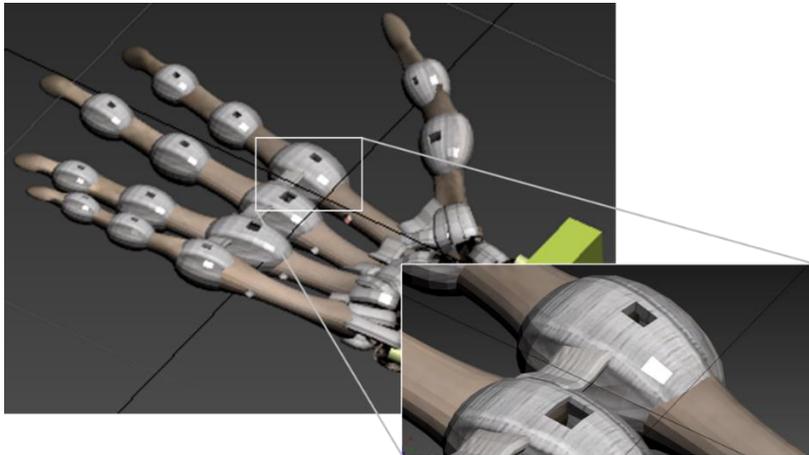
Hand CAD model showing the finger ligament designs. Hand CAD model showing the finger joint design, with the inset picture showing how the softer ligament material has square cut outs to allow the support material to be removed from the joint area after printing.
